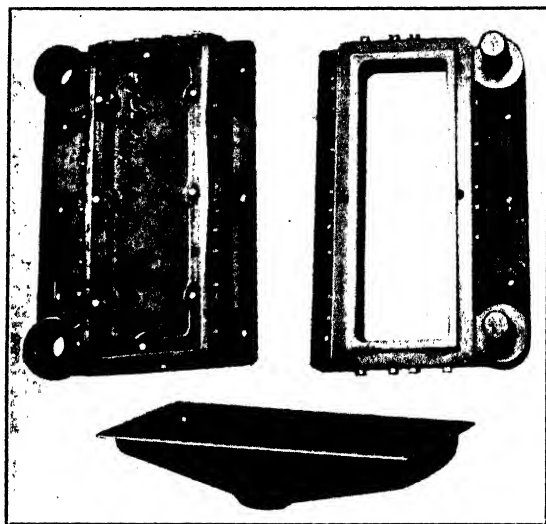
Automobile oil pan trimming die with wedge scrap cutters.
